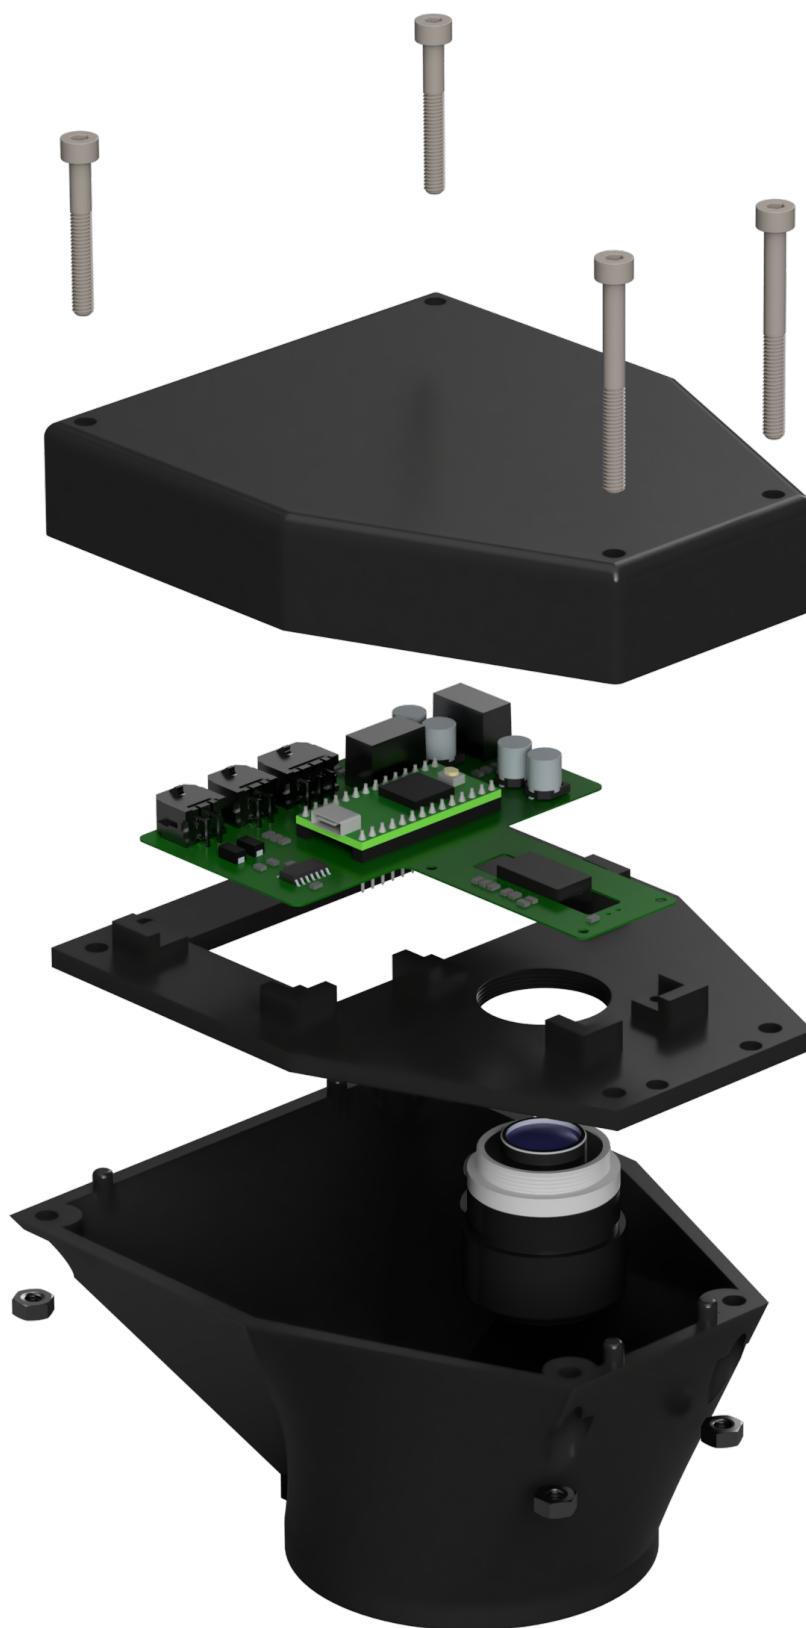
Rendered exploded view of the finished NGSS prototype.
